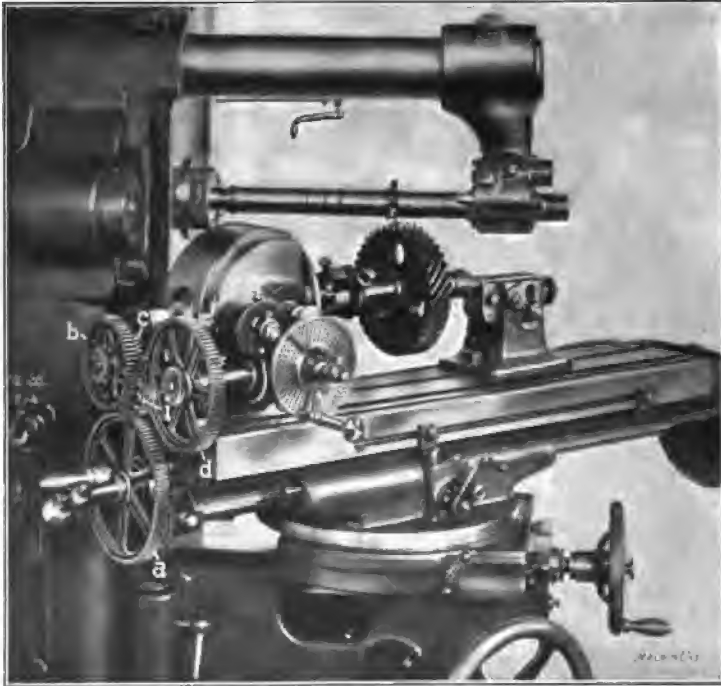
Cutting the Teeth of a Spiral Gear in a Universal Milling Machine
